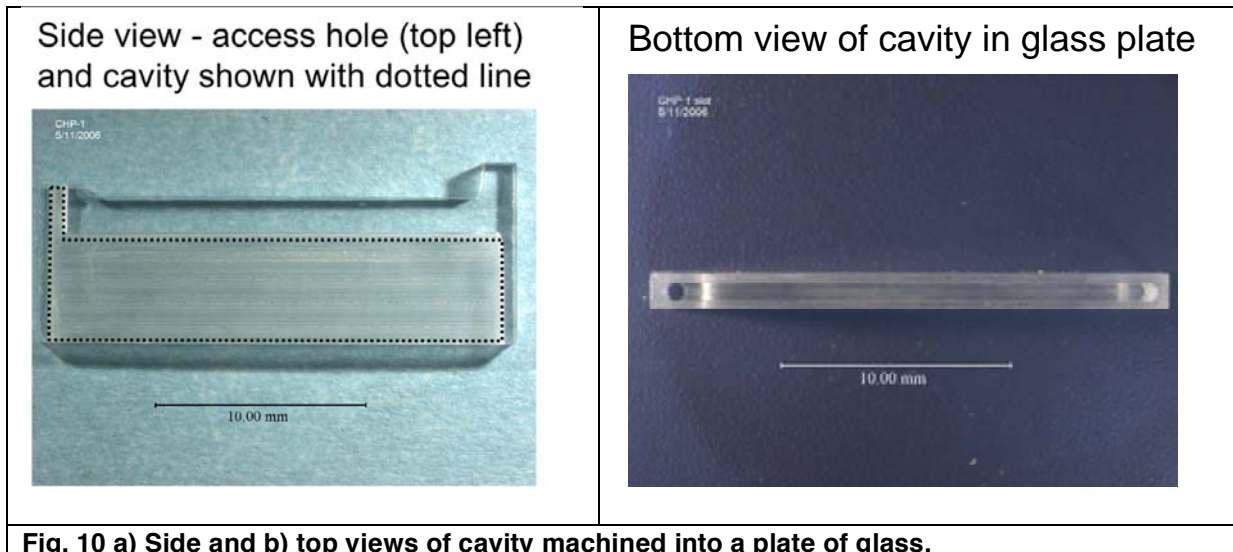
a) Side and b) top views of cavity machined into a plate of glass.
